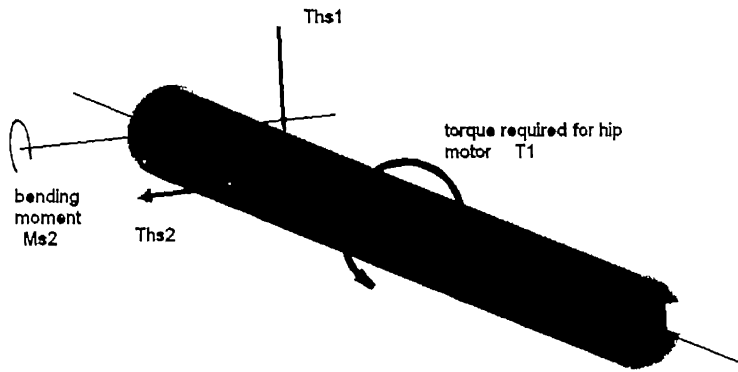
Shear forces, torques and moments on the shaft of hip motor.
